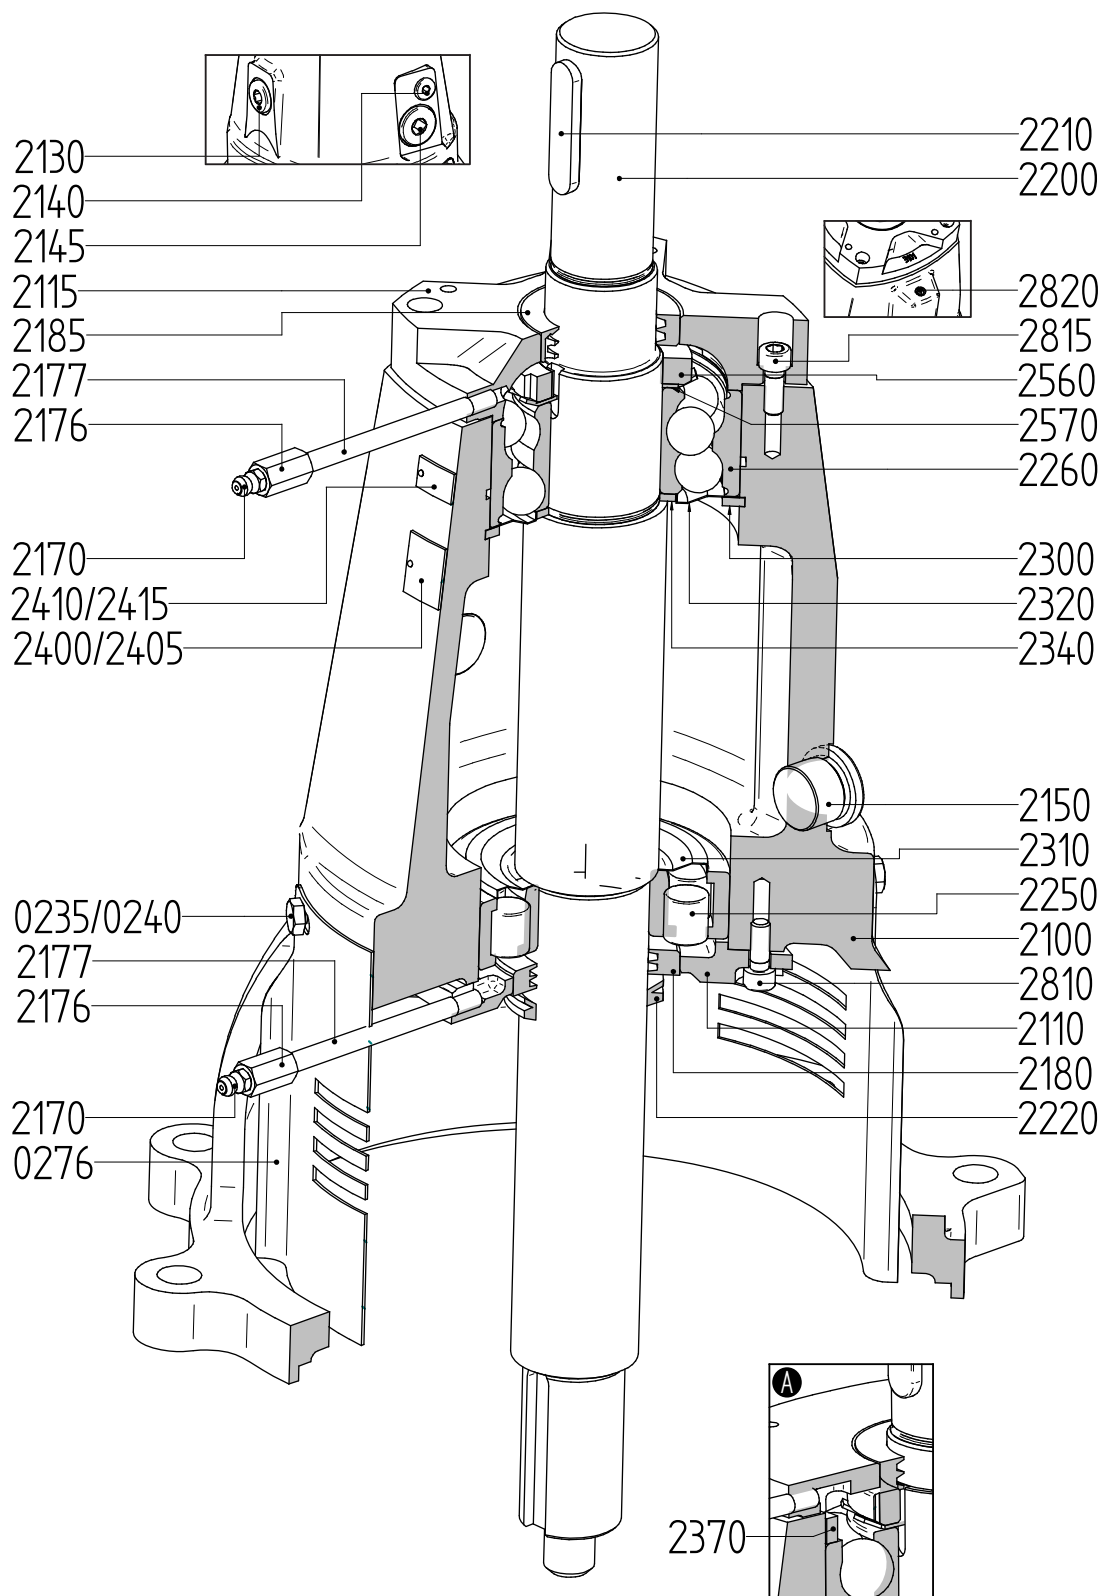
Sectional drawing bearing bracket, bearing group 1-2-3 (A = for bearing group 3).
